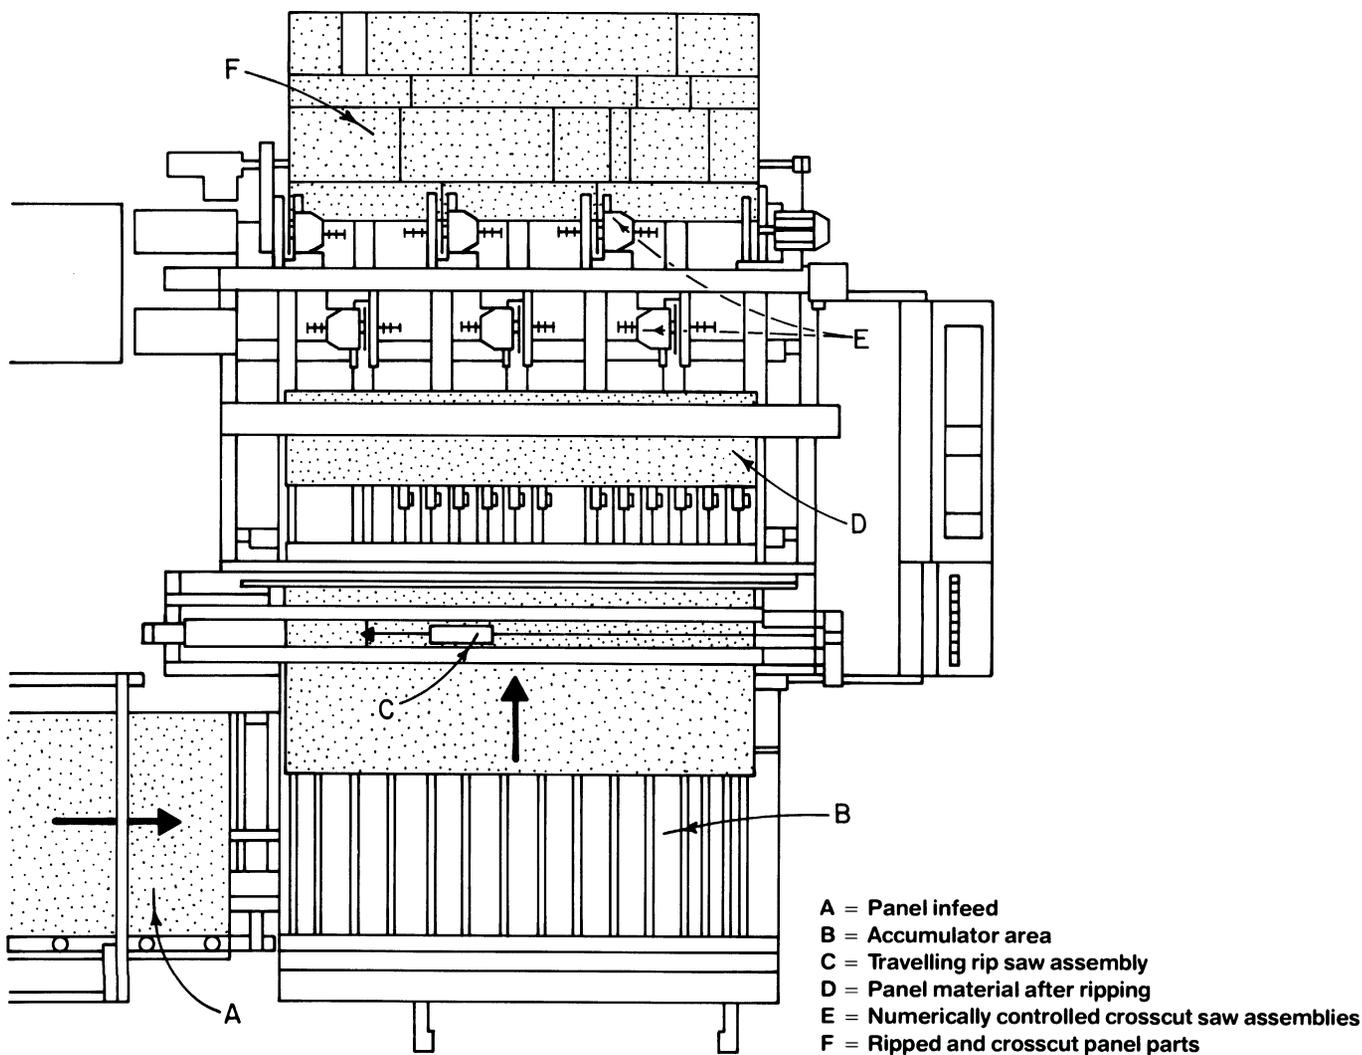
Schematic drawing of panel-sizing machine (McMillin 1982).
